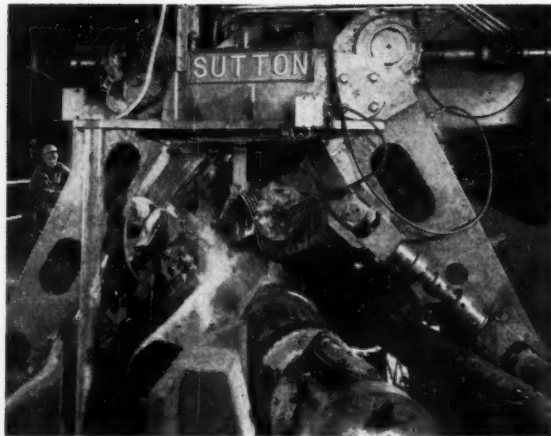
Exit end of large rotary straightening machine. From here the pipe progresses to the cutting and threading machines. Equipment also includes a gag-press straightener.
